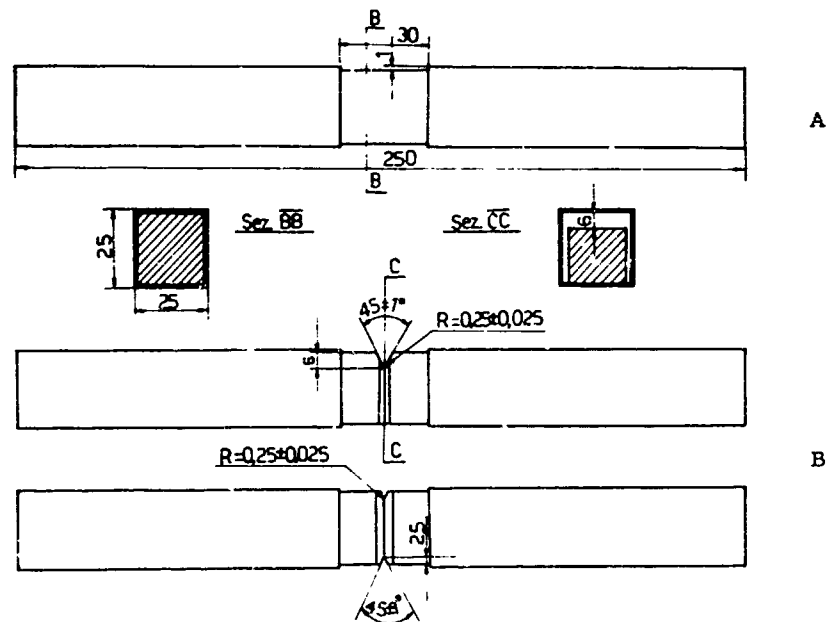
Stress Corrosion Cracking Specimens Geometry
